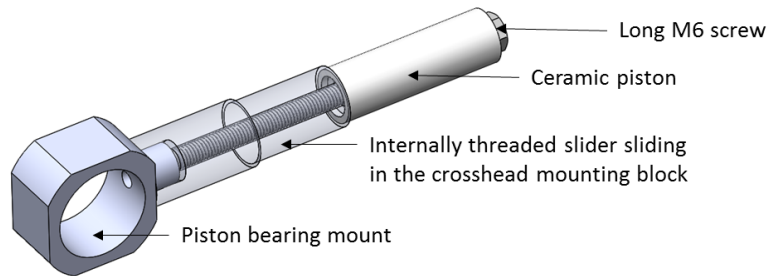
Piston bearing mount, slider and piston of linkage mechanism assembly
